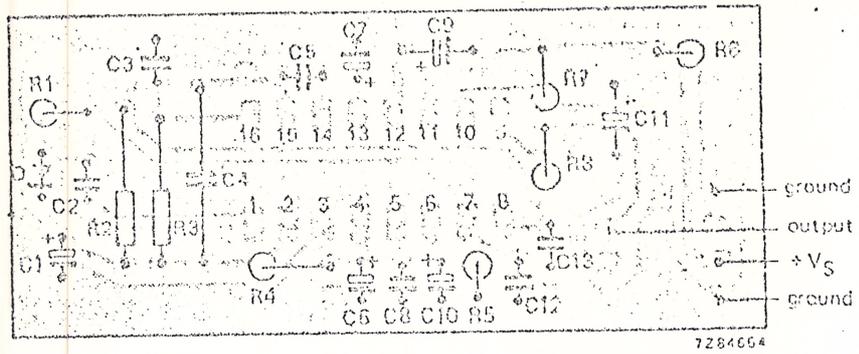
Component side of printed-circuit board showing component layout used for the circuit of Fig. 7.
